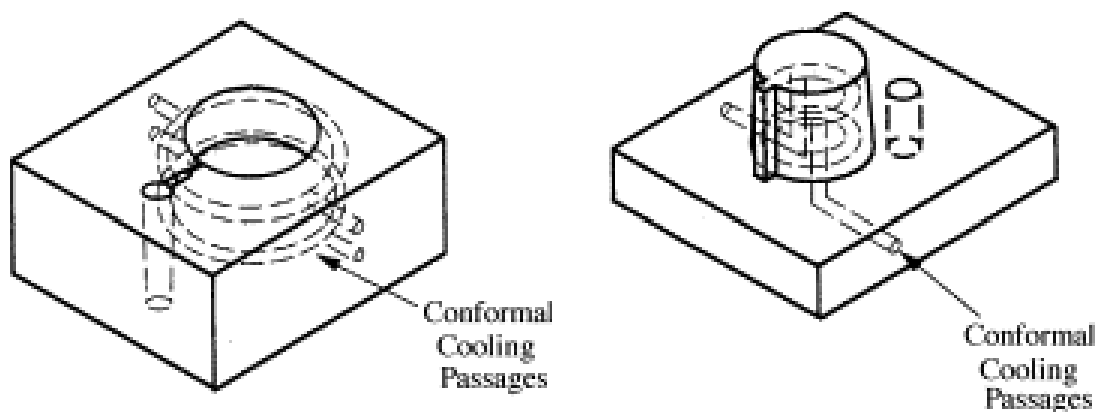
Conformal cooling channels in injection moulding core and cavity [9]
